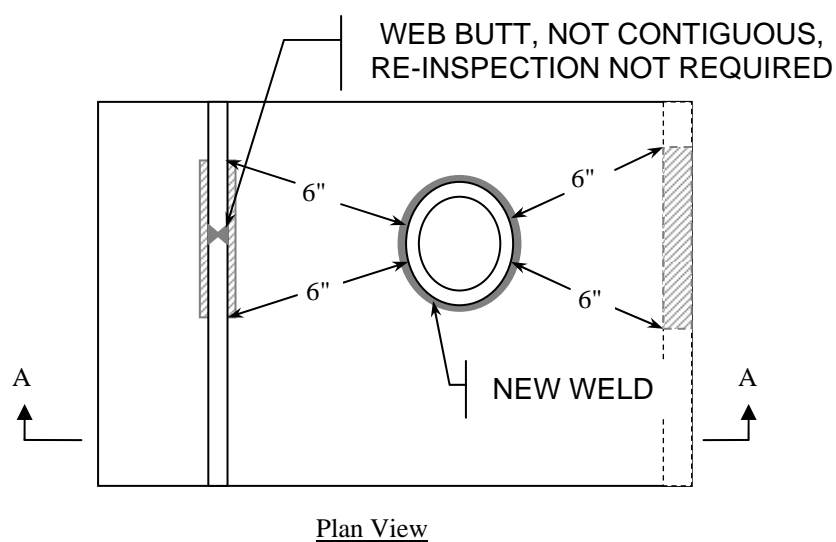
B. EXAMPLES OF CONTIGUOUS MEMBER WELD RE-INSPECTION.
